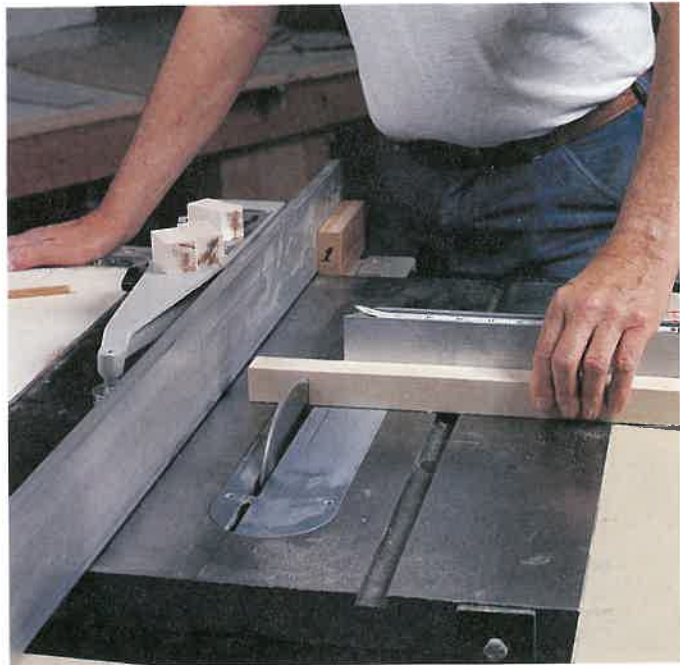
Use an adjustable stop attached to a sliding table for cutting duplicate panel parts to length. Guards are removed to show procedure. (Chuck Davis Cabinets)
